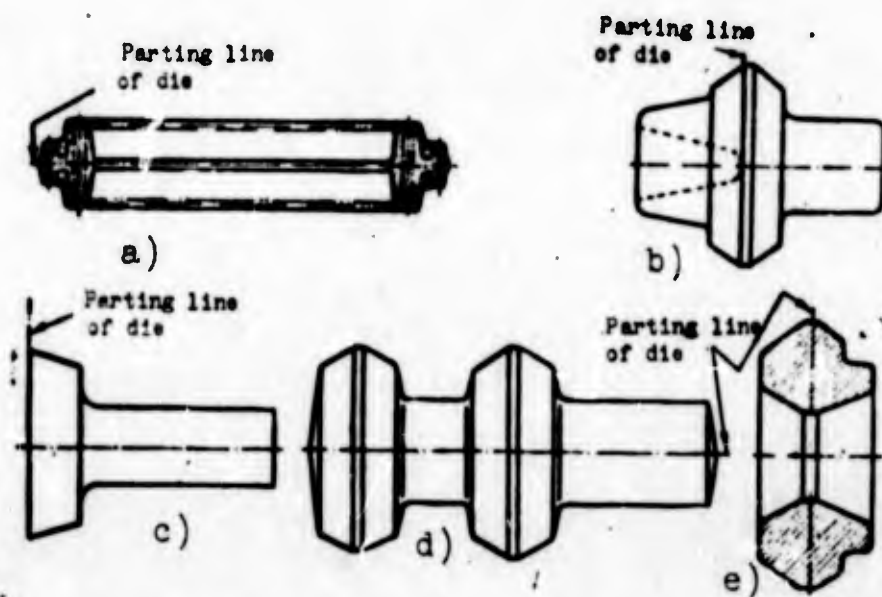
Gear blanks. a, d, e) drop-forged in closed dies; b) forged on horizontal forging machine; c) upset in an open die on a press.
